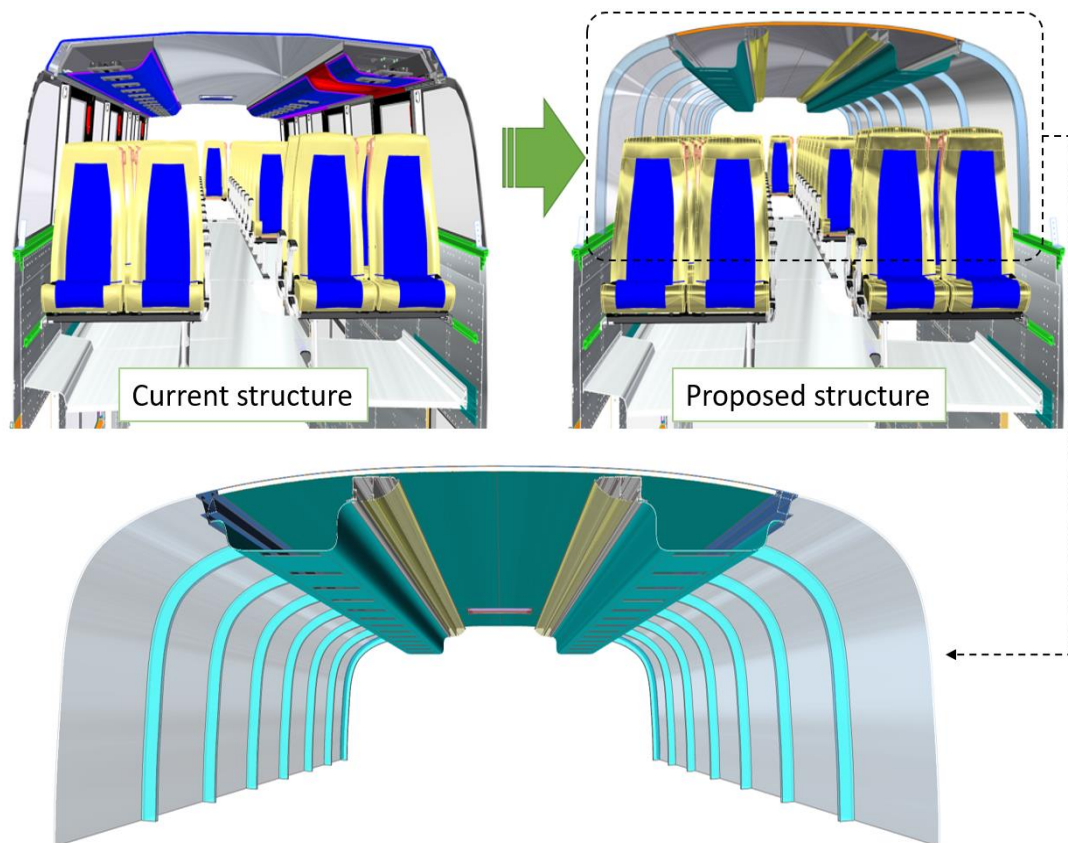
3D projection of the interior of the proposed upper-deck structure.
